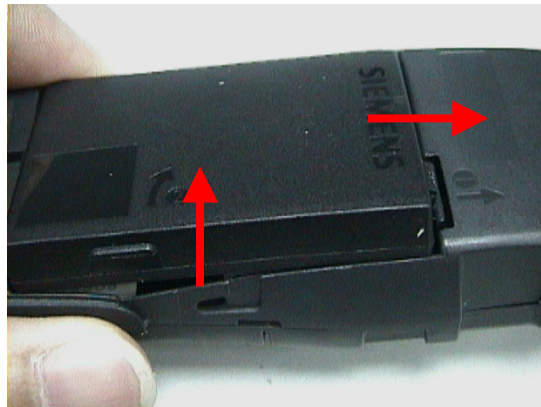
DISASSEMBLE A50– STEP 1
